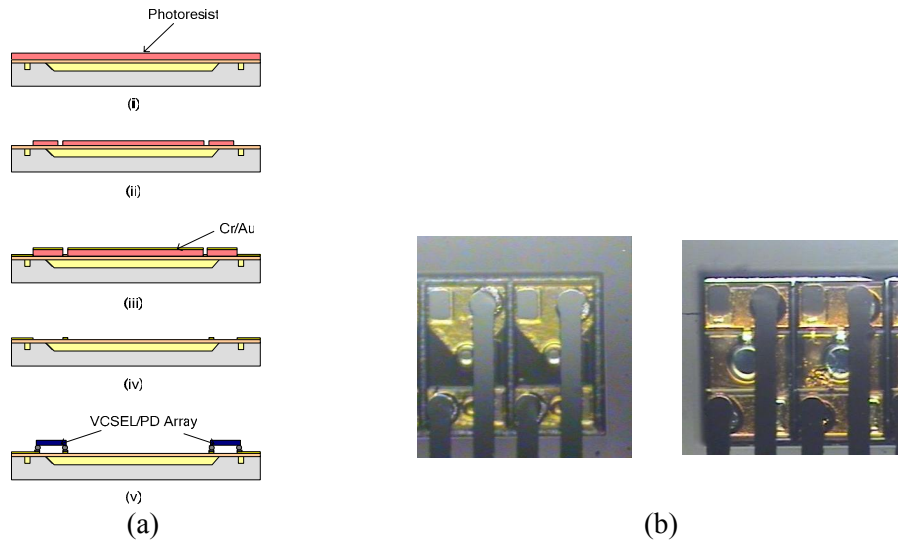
(a) Fabrication process of the electrical transmission lines and flip-chip bonding and fabricated flexible optical printed circuit board. (b) Bottom views of the VCSEL and PD array after chip bonding
